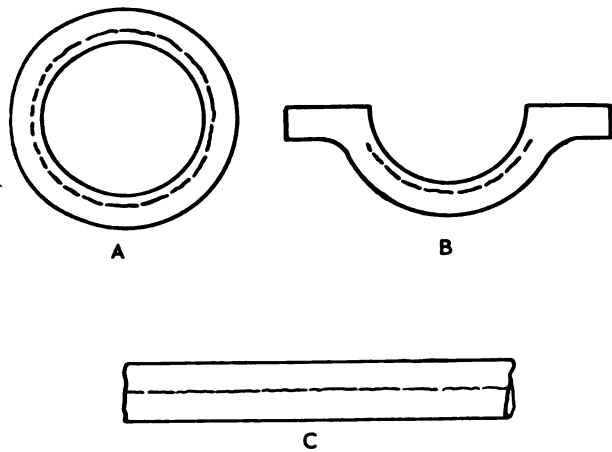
Typical padding of sections to prevent centerline shrinkage cavities.
